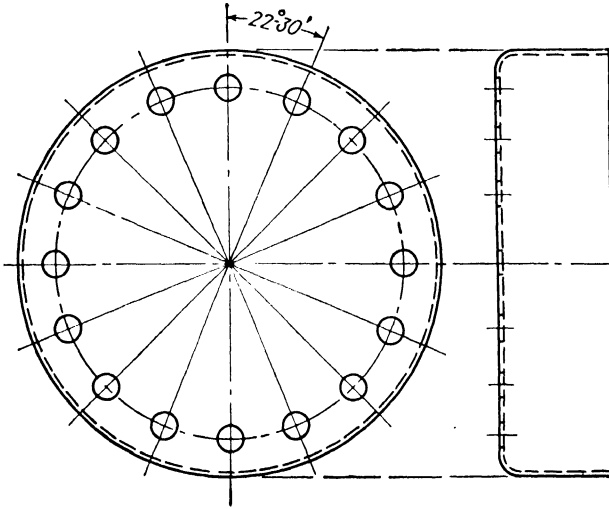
Sixteen equally spaced holes in the bottom of a drawn shell that can be punched in a cheap die similar to the one shown in the preceding figure.
